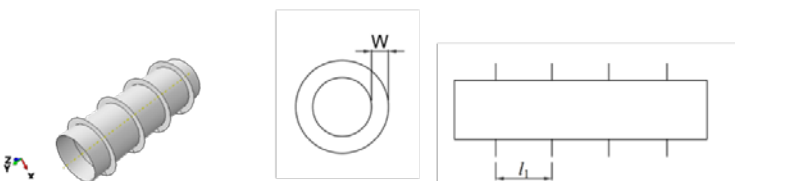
Geometrical cylindrical shell: (c) ring-stiffened cylinder shell.
